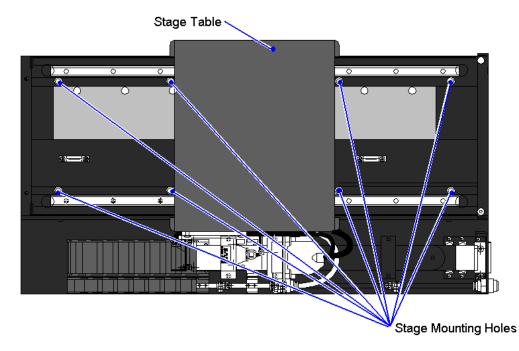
Internal View of ALS20000 / ALS25000 Stage Showing Mounting Holes
